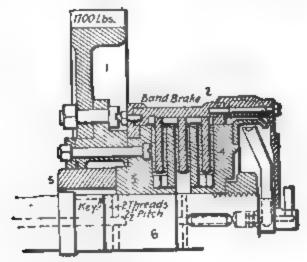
Sellers Type Disc Friction Brake for Boat Crane Full Load Torque = 21,900 In. Lbs.
